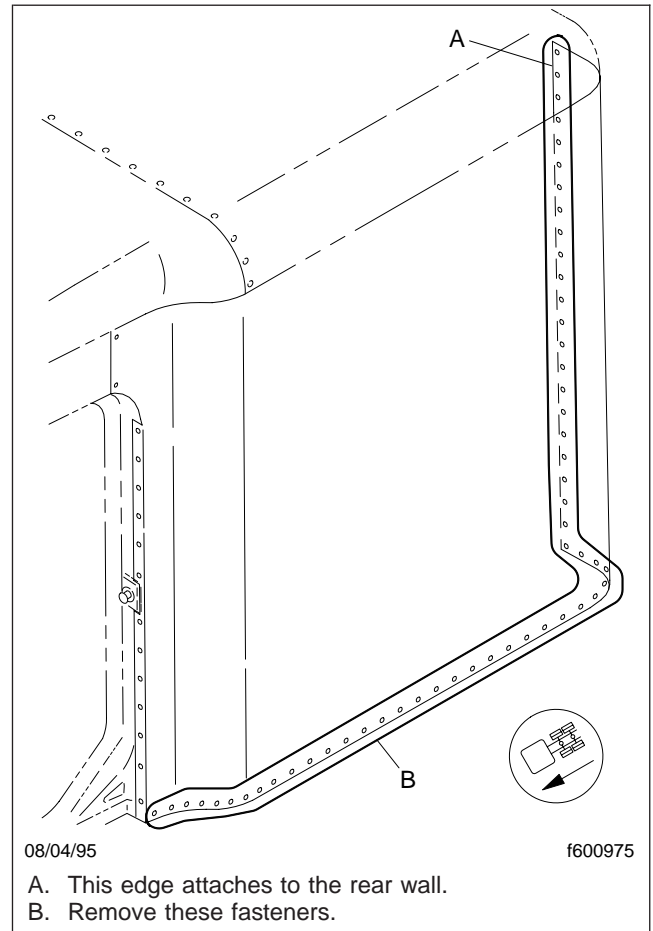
, Sidewall Fasteners to the Cab Deck and Rear Wall
